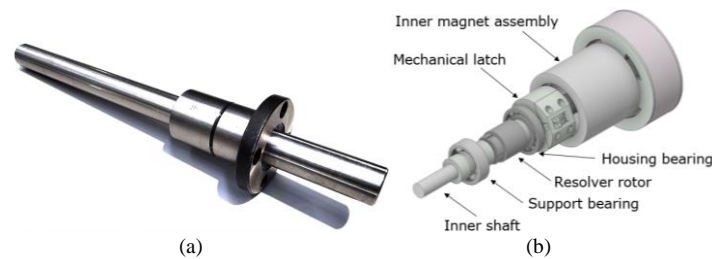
Inner shaft assembly: (a) ball spine shaft (pre-machined), and (b) complete assembly.
